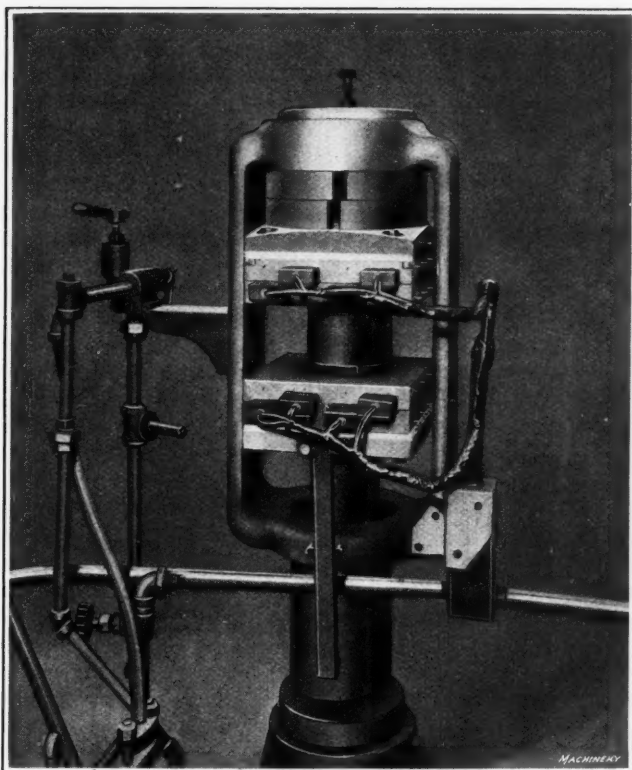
Close View of Press with Magnesia Covering removed to show Wiring and Heating Units
